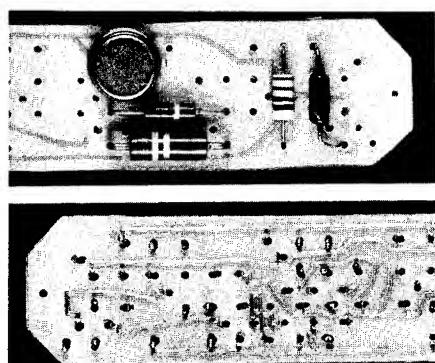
Nickel lead welded to single layer epoxy board.
